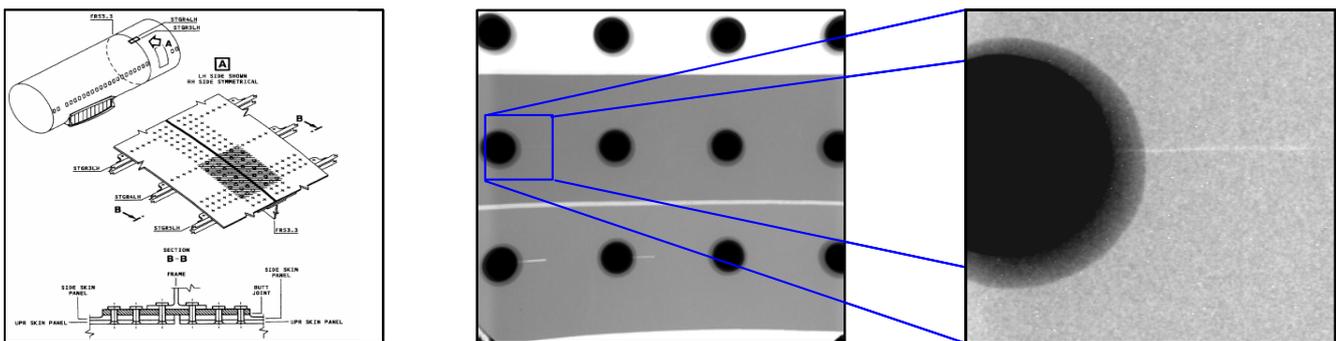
Lap joint with electro-eroded and fatigue cracks: zoomed image - fatigue crack of 0.1mm opening.
